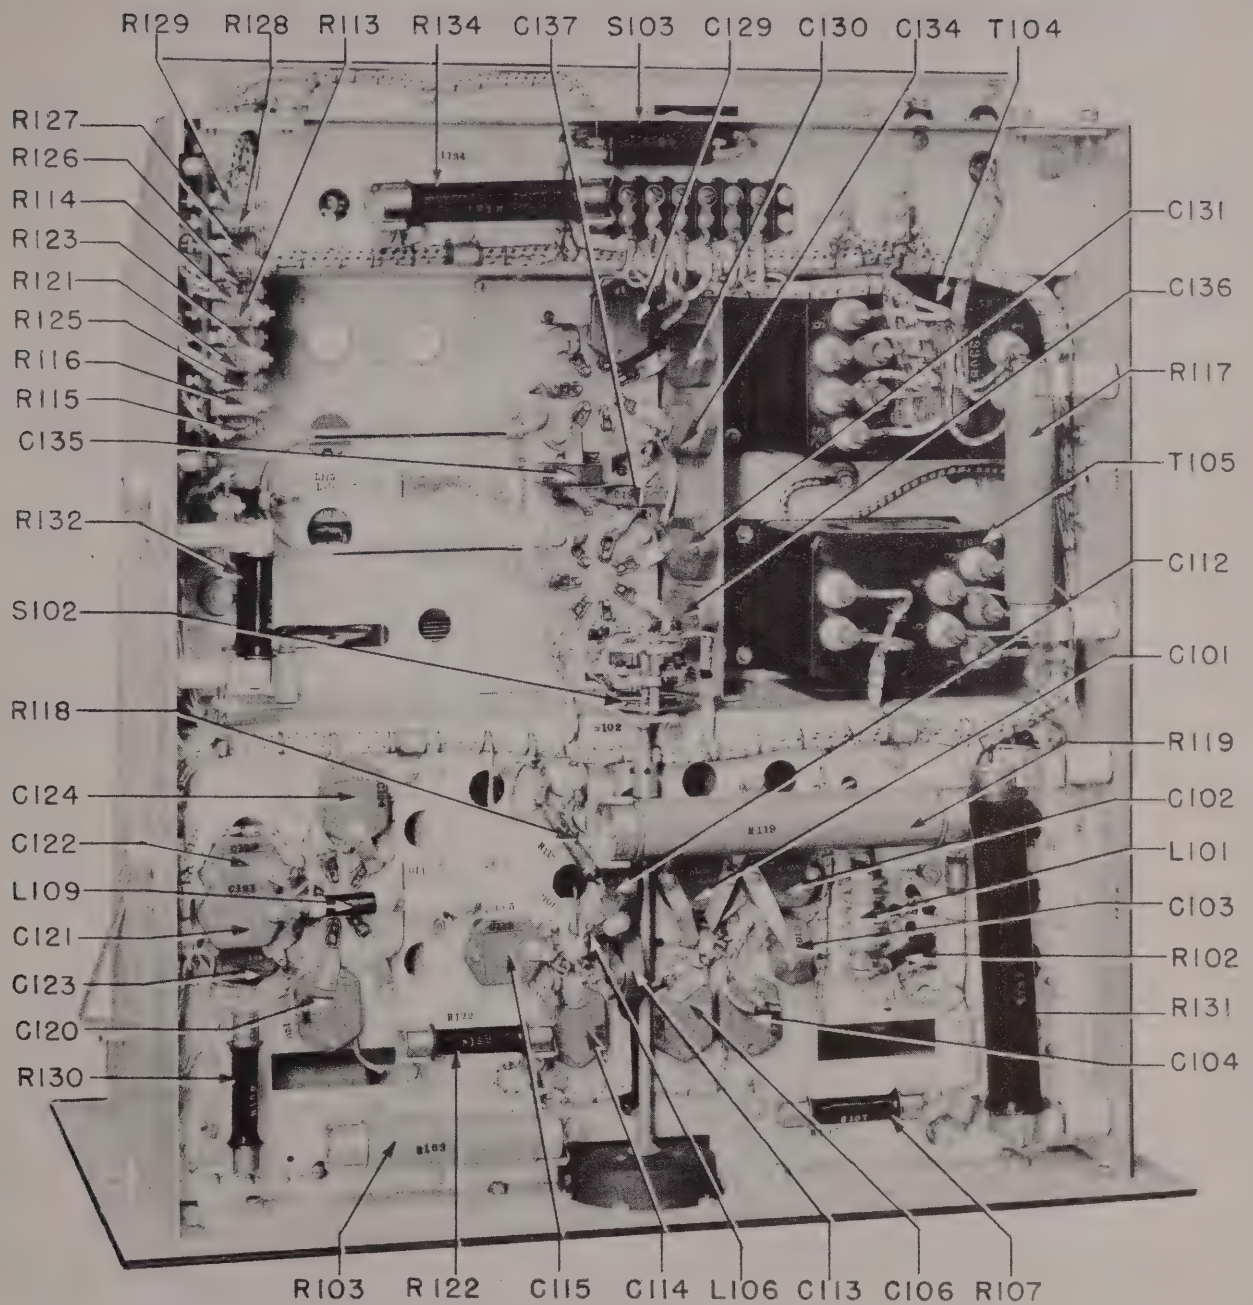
Radio Transmitter T-66/CRN-10—Bottom View of R-F Chassis
